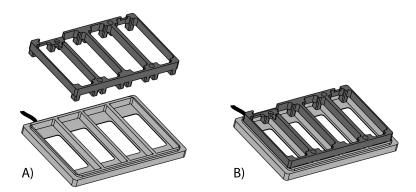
Heated Plate for 4 μ -Slides (lower part) and magnetic holder (upper part) (A) and assembled (B).
